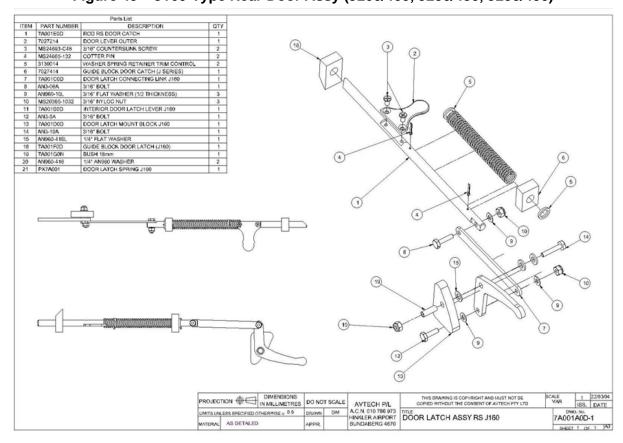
J160-Type Door Latch Mechanism Assembly (all J-Series, n/a J200/J400)
